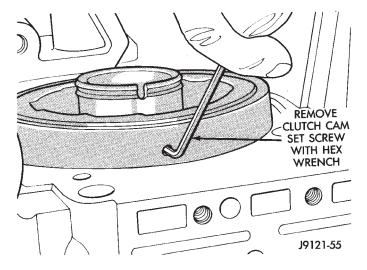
Removing/Installing Clutch Cam Setscrew—46RH
